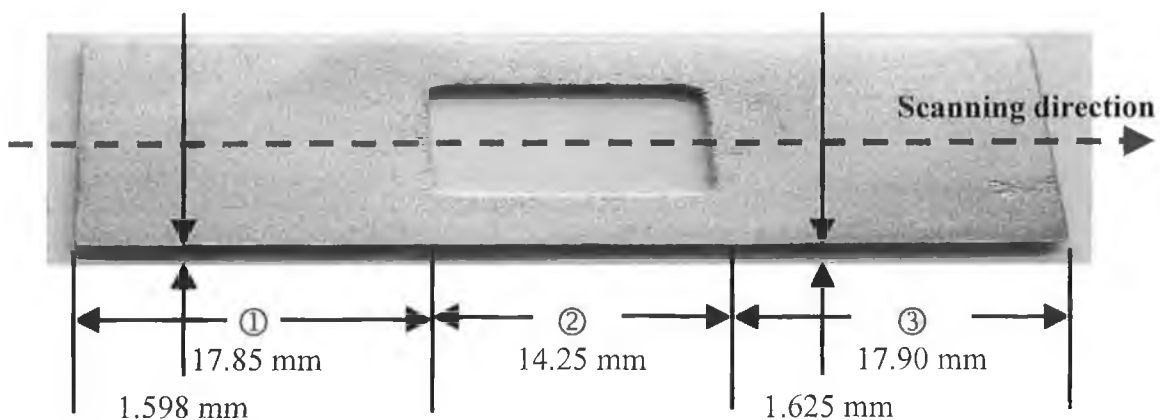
Aluminium plate with a rectangular hole inside (sample-4)
